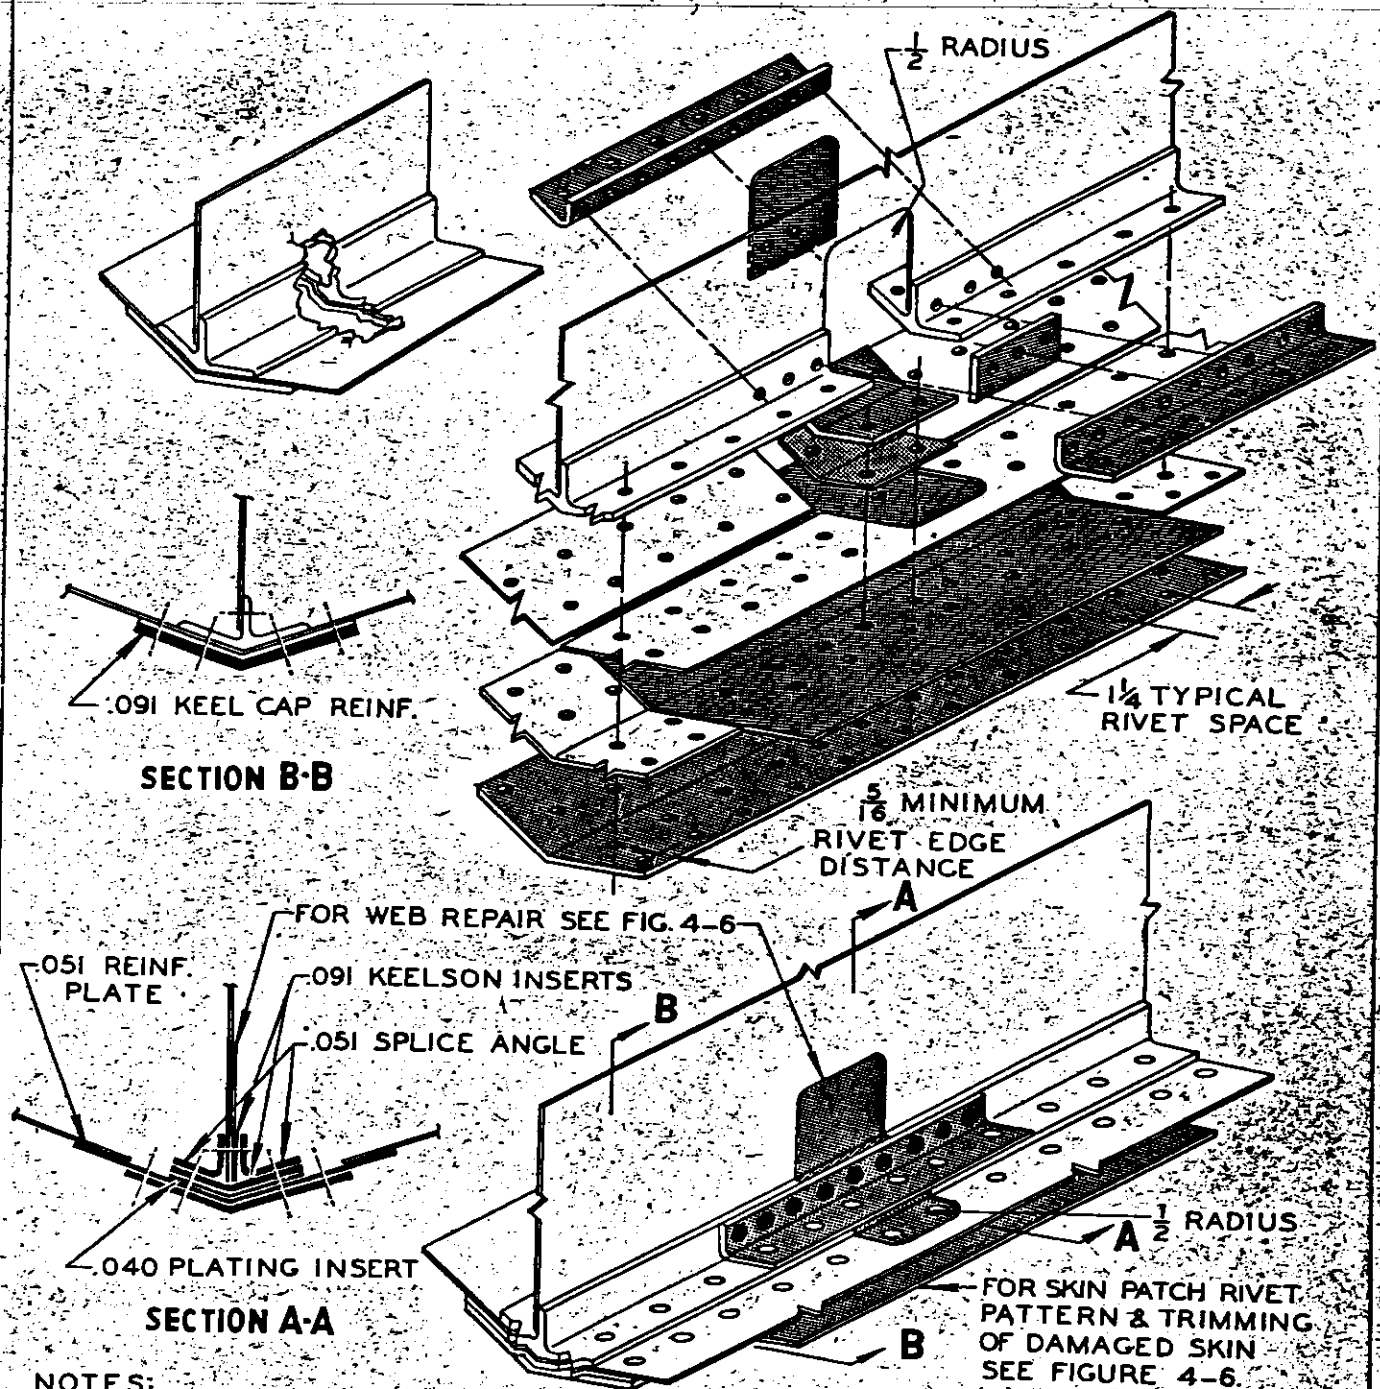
(Sheet 2 of 2 Sheets)—Twin Keel Repair
